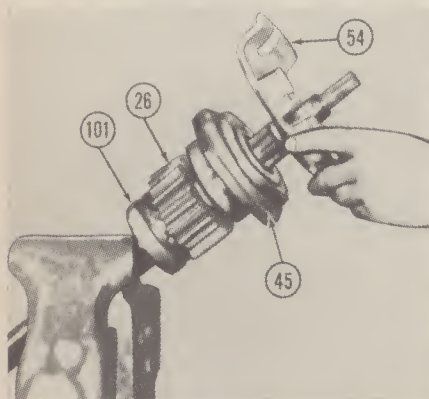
Removing pto clutch housing (54) from mounting sleeve (45). Drive gear is (26).
